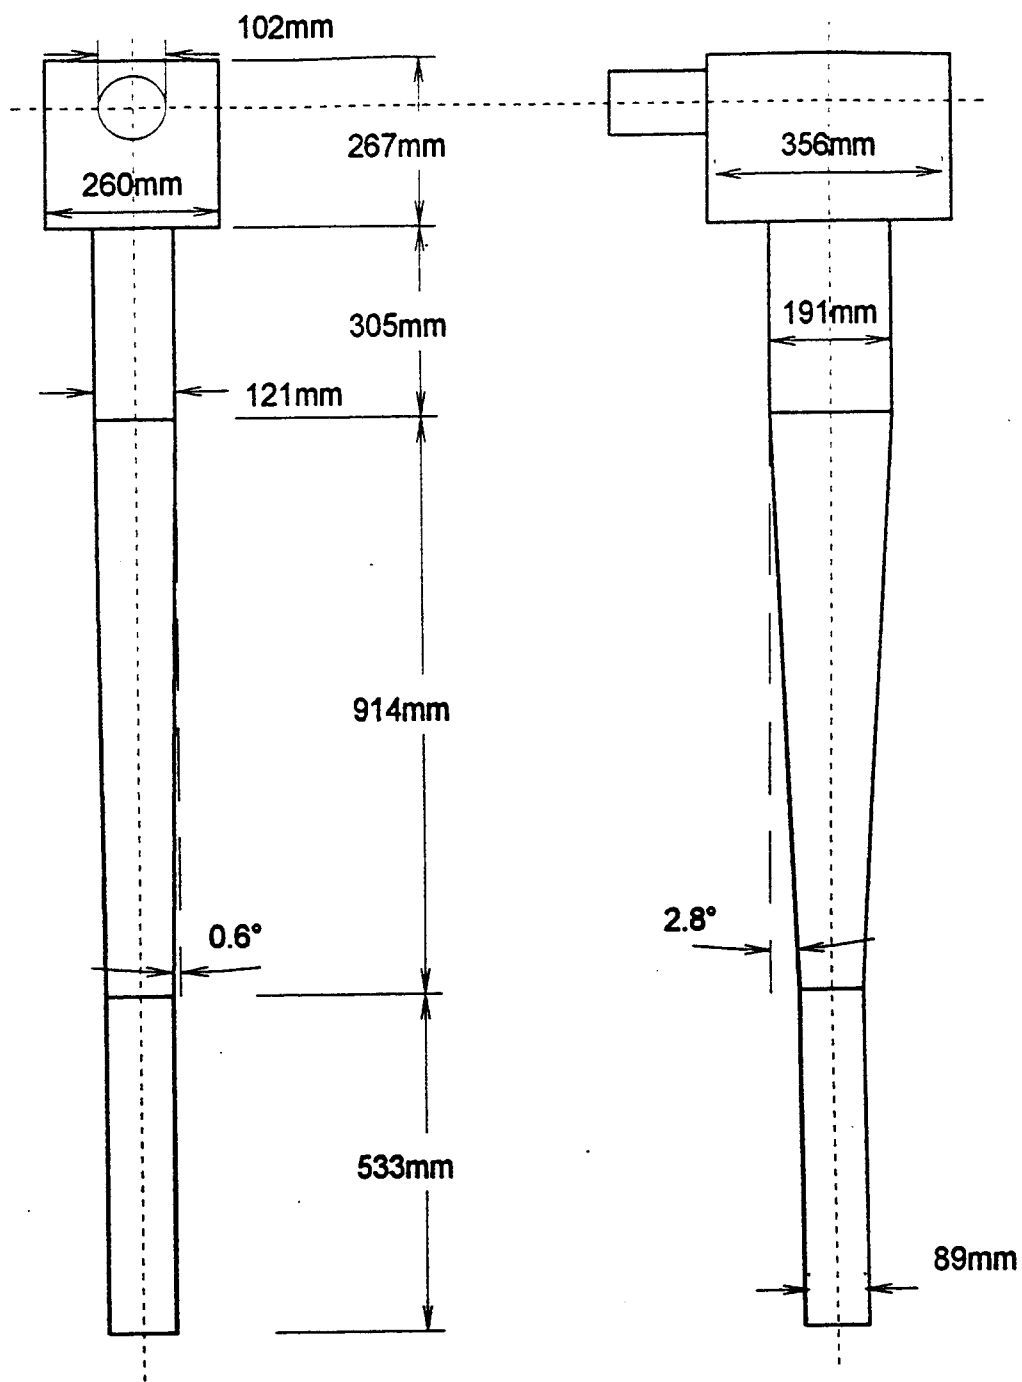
Shallow Angle Prototype Panel Filter Test Housing
